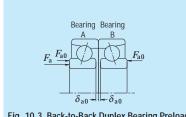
Back-to-Back Duplex Bearing Preload
